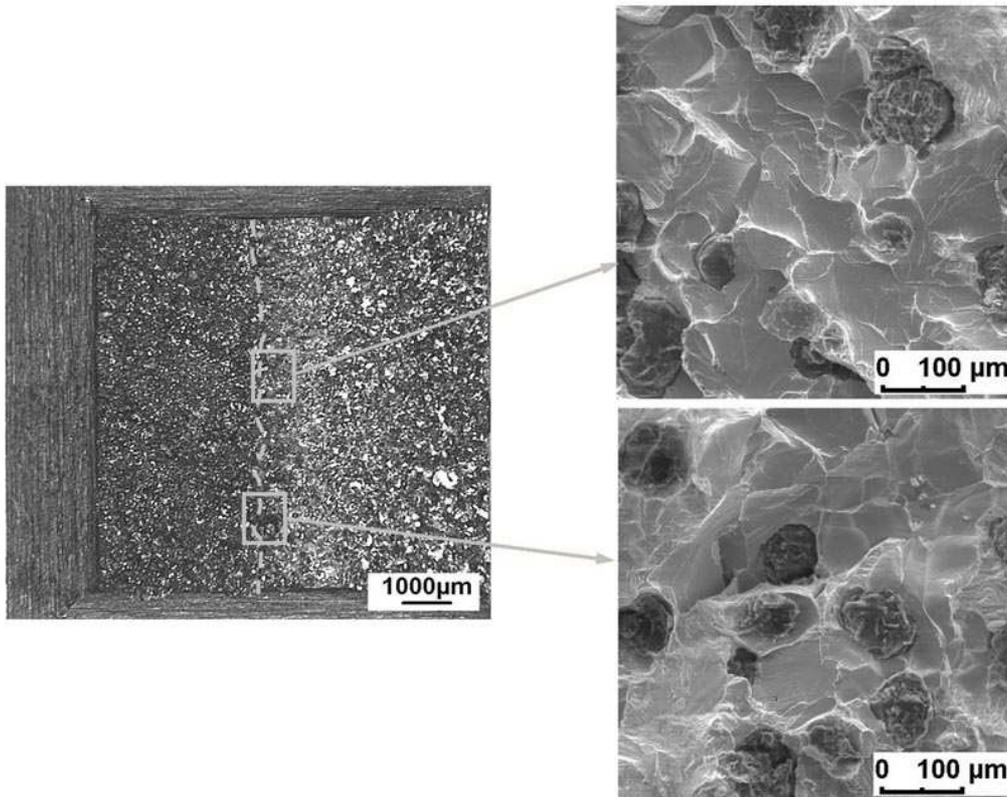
Cleavage crack propagation on the fracture surface of the SE(B)10 samples at -40 °C
